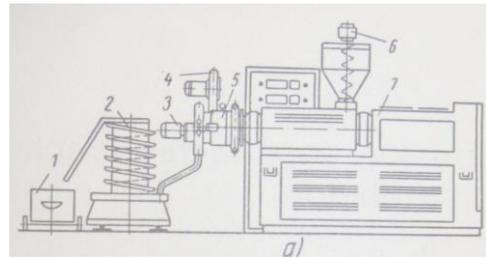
(a) Installation for granulating extruded thermoplastic materials: the wire or rod is cut into pellets directly into the grid.
